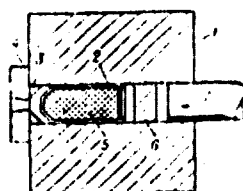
General view of device for extrusion of beryllium rods: 1) movable yoke; 2) steel casing (container); 3) conical insert; 4) die; 5) beryllium; 6) graphite plug; 7) punch.
